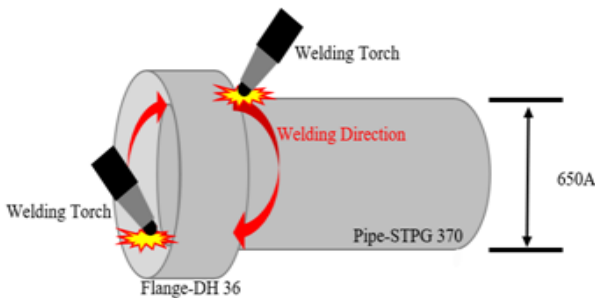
A schematic diagram for pipe-flange weld process
